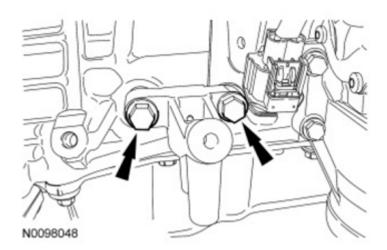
Locating Bolts And A/C Compressor Courtesy of FORD MOTOR CO.
